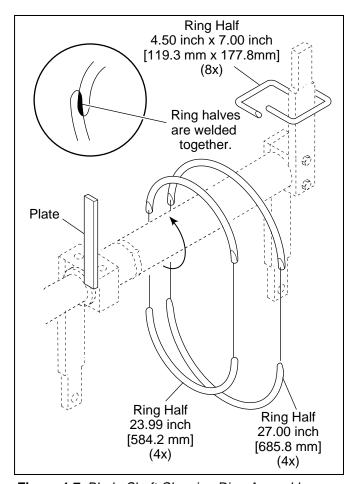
Blade Shaft Cleaning Ring Assembly
